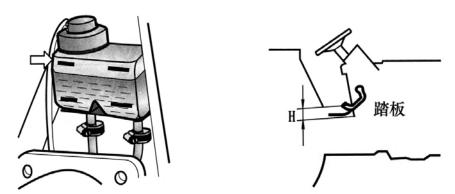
Check oil level of service brake's oil tank Fig. 5-3 Mounting of brake pedal
